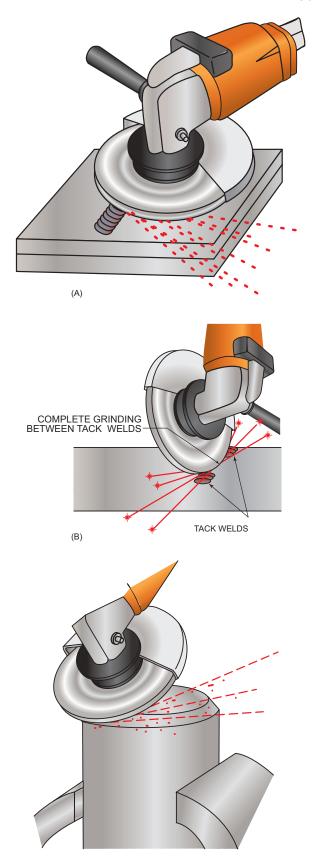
Abrasive grinding disk can be used to (A) remove excessive weld metal, (B) cut a groove, or (C) prepare a bevel for welding.
